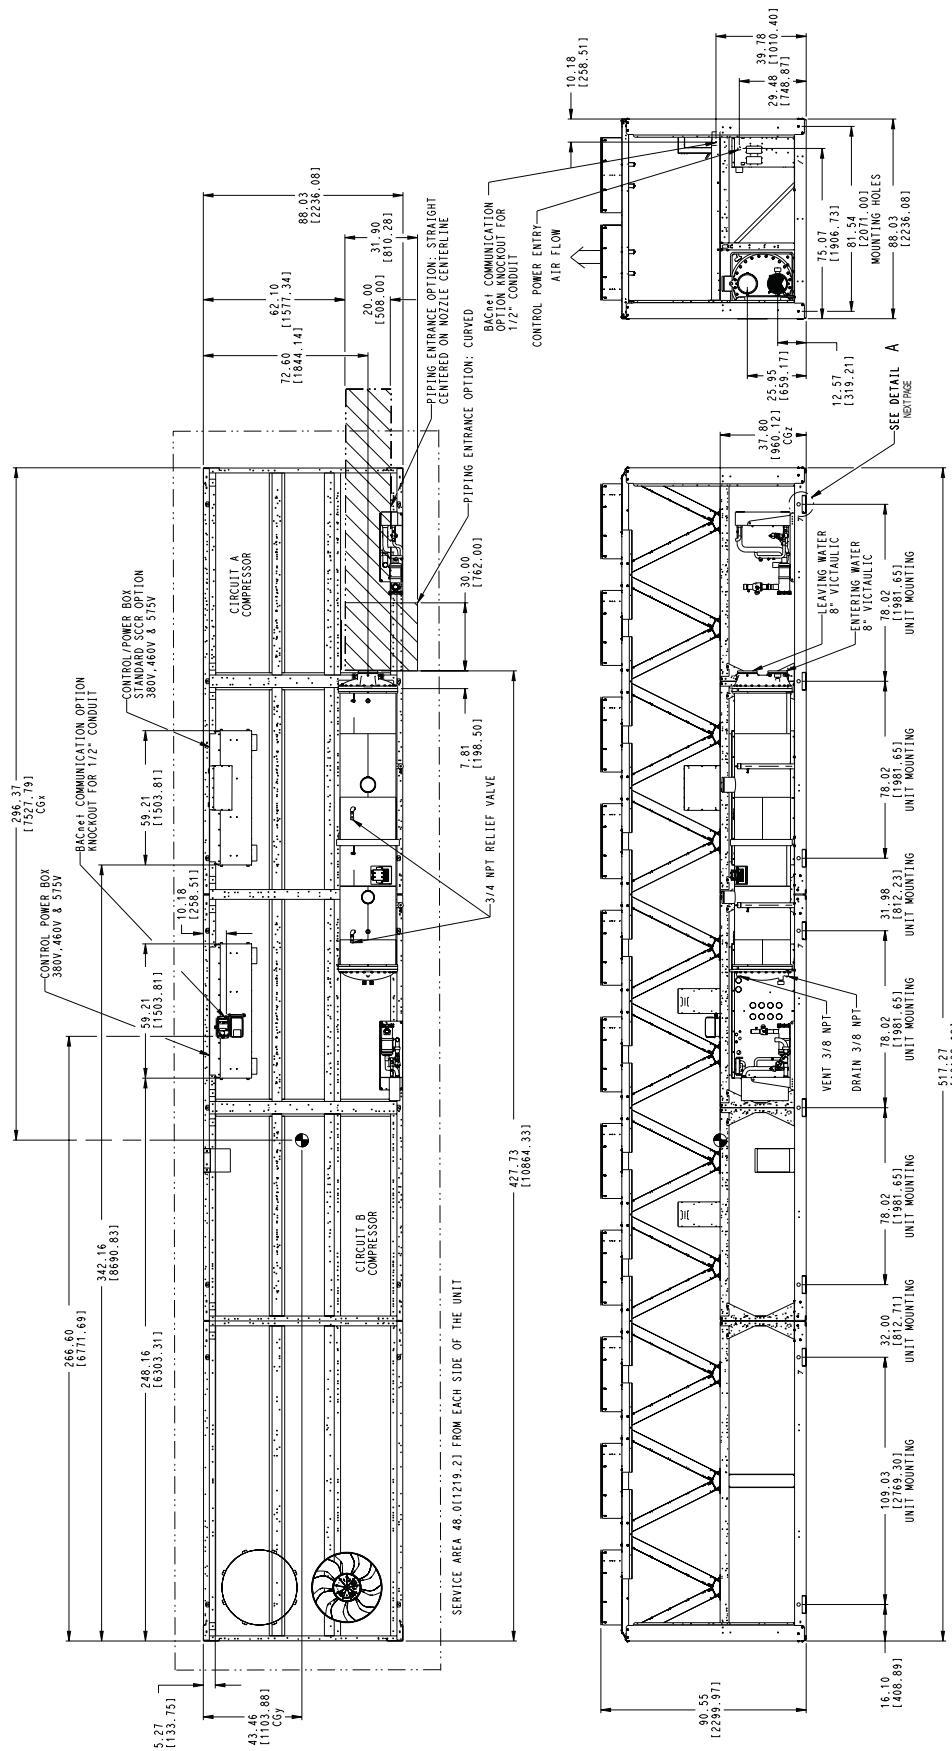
30XA451 Air-Cooled Liquid Chiller Dimensions
